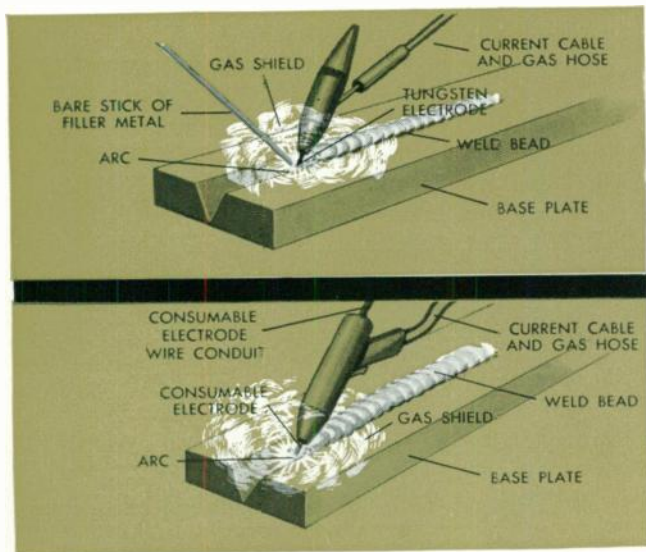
(Top) Schematic diagram of the gas-shielded tungsten-arc welding process.
